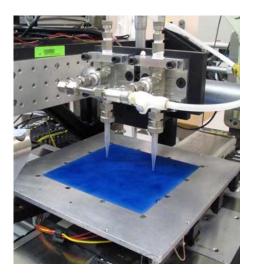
Prototype Bus Bar Printing Head – two bus bars are printed simultaneously.
